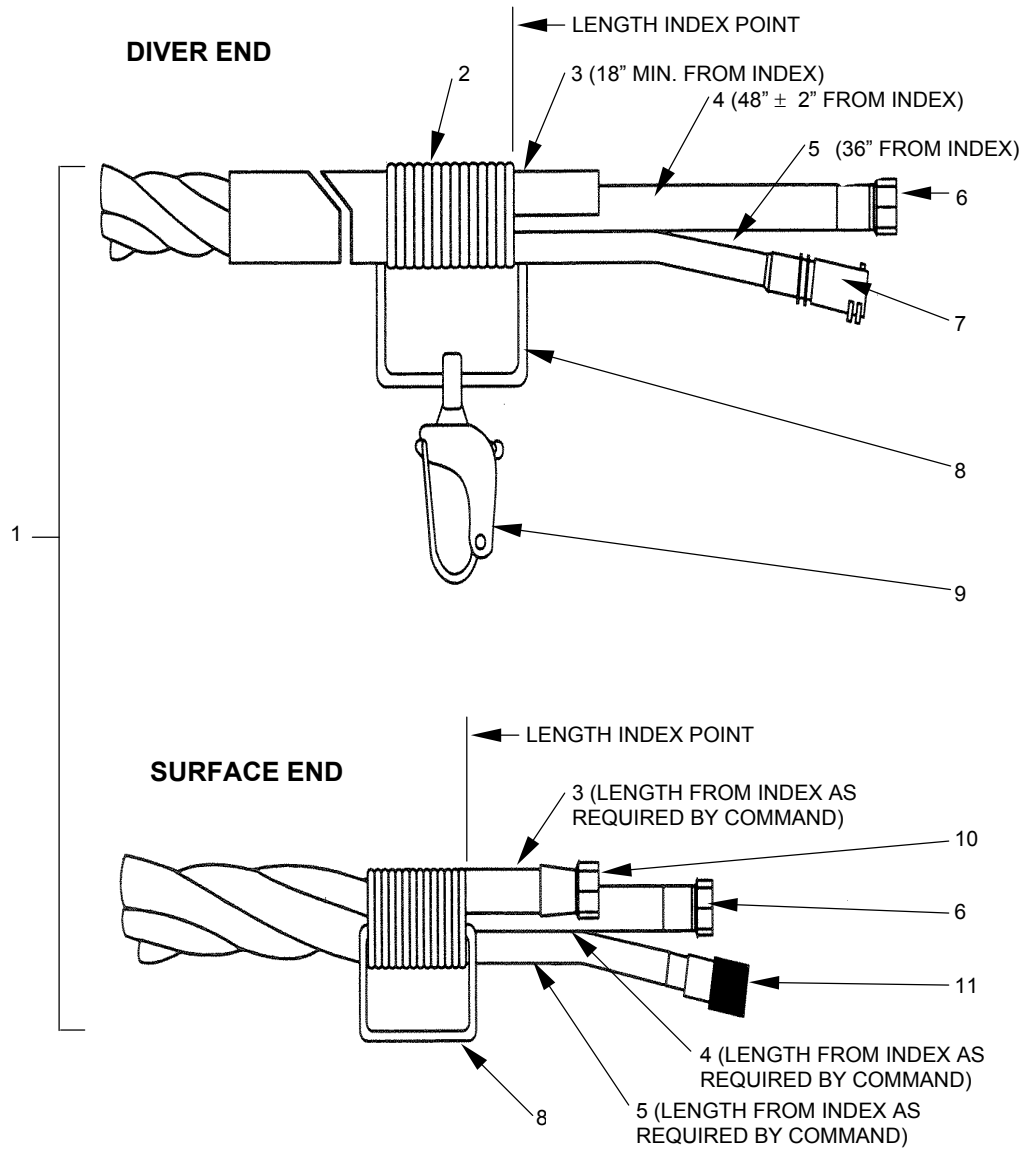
Mk 21 Aqualite 3-Part Spiral-Wound Umbilical Assembly (Mar-Vel)
